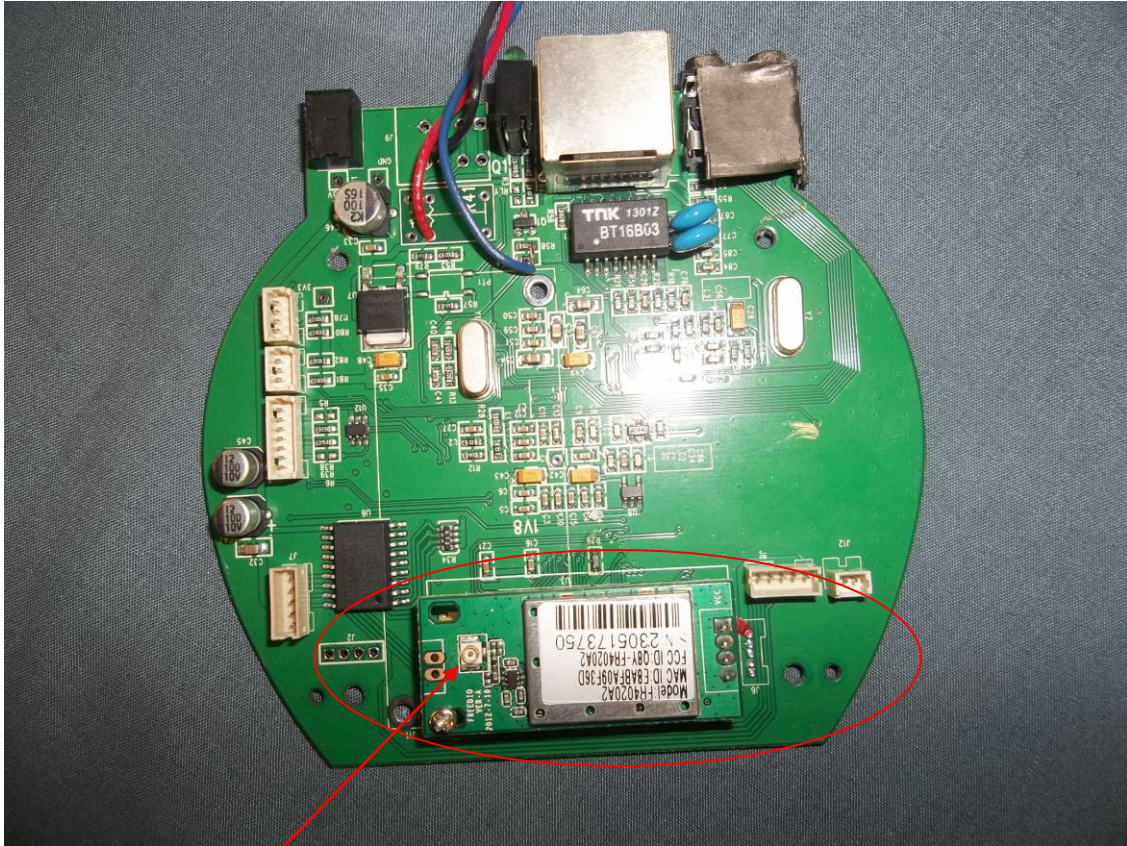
HOST Device PCB, Component Side, with HOST Radio
